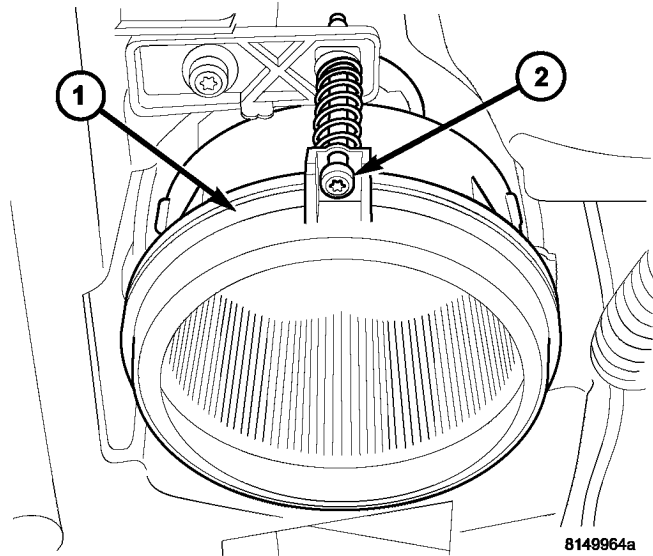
Front Fog Lamp Adjusting Screw - Grille-Mounted
